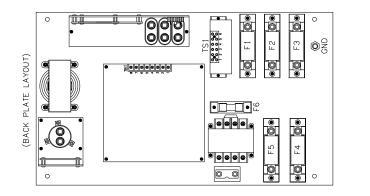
M3345 "B" Chassis with Fan Dimensional Outline
